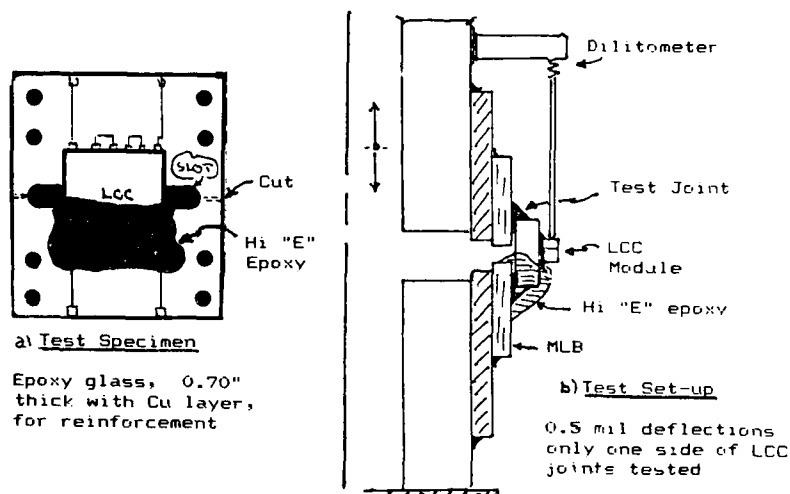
LCC SOLDER JOINT MECHANICAL FATIGUE TESTING
